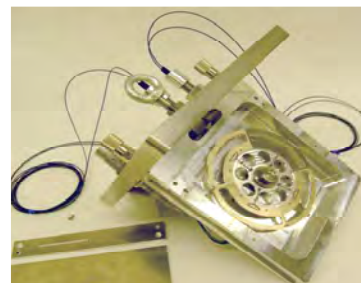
The complete assembly of the 100 mm target wheel in its cassette.
